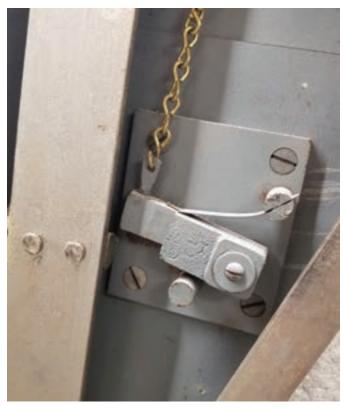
Disassembly. With the inner cover removed, the entire mechanism could be observed. This lower relocker used a strong spring to actively block the bolt mechanism if it were activated. The attached chain leads up to the lock case.
